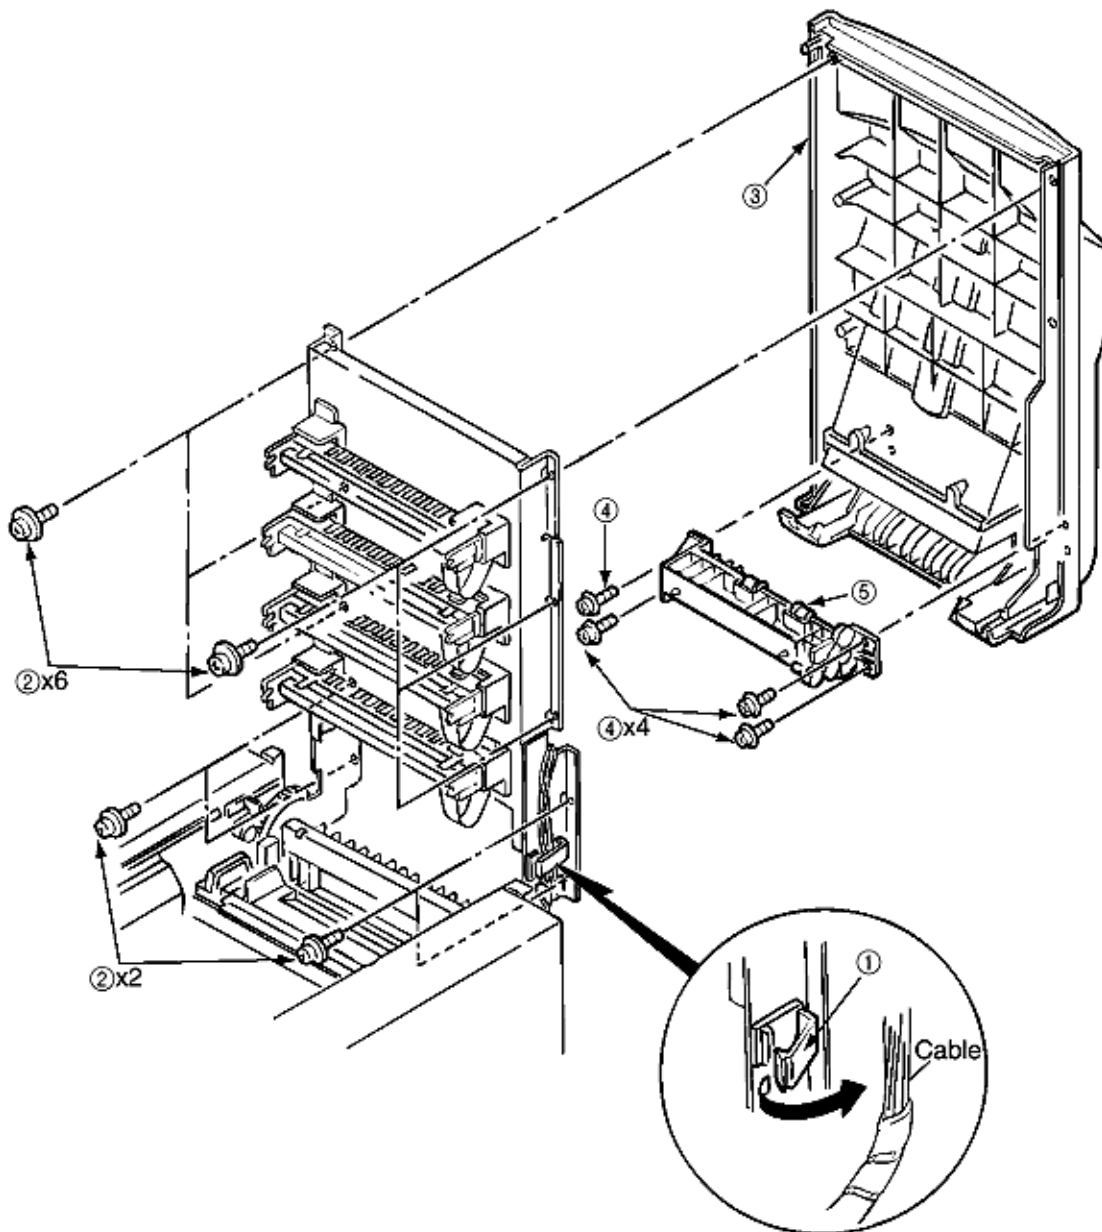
Cover Assy Stacker, Guide Eject FD Assy
